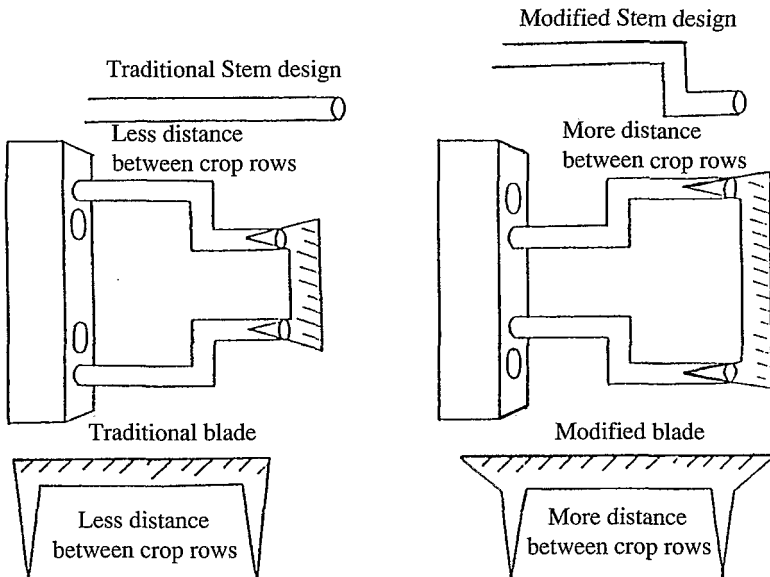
Modifications to the design of the stem and blade of the blade hoe.
